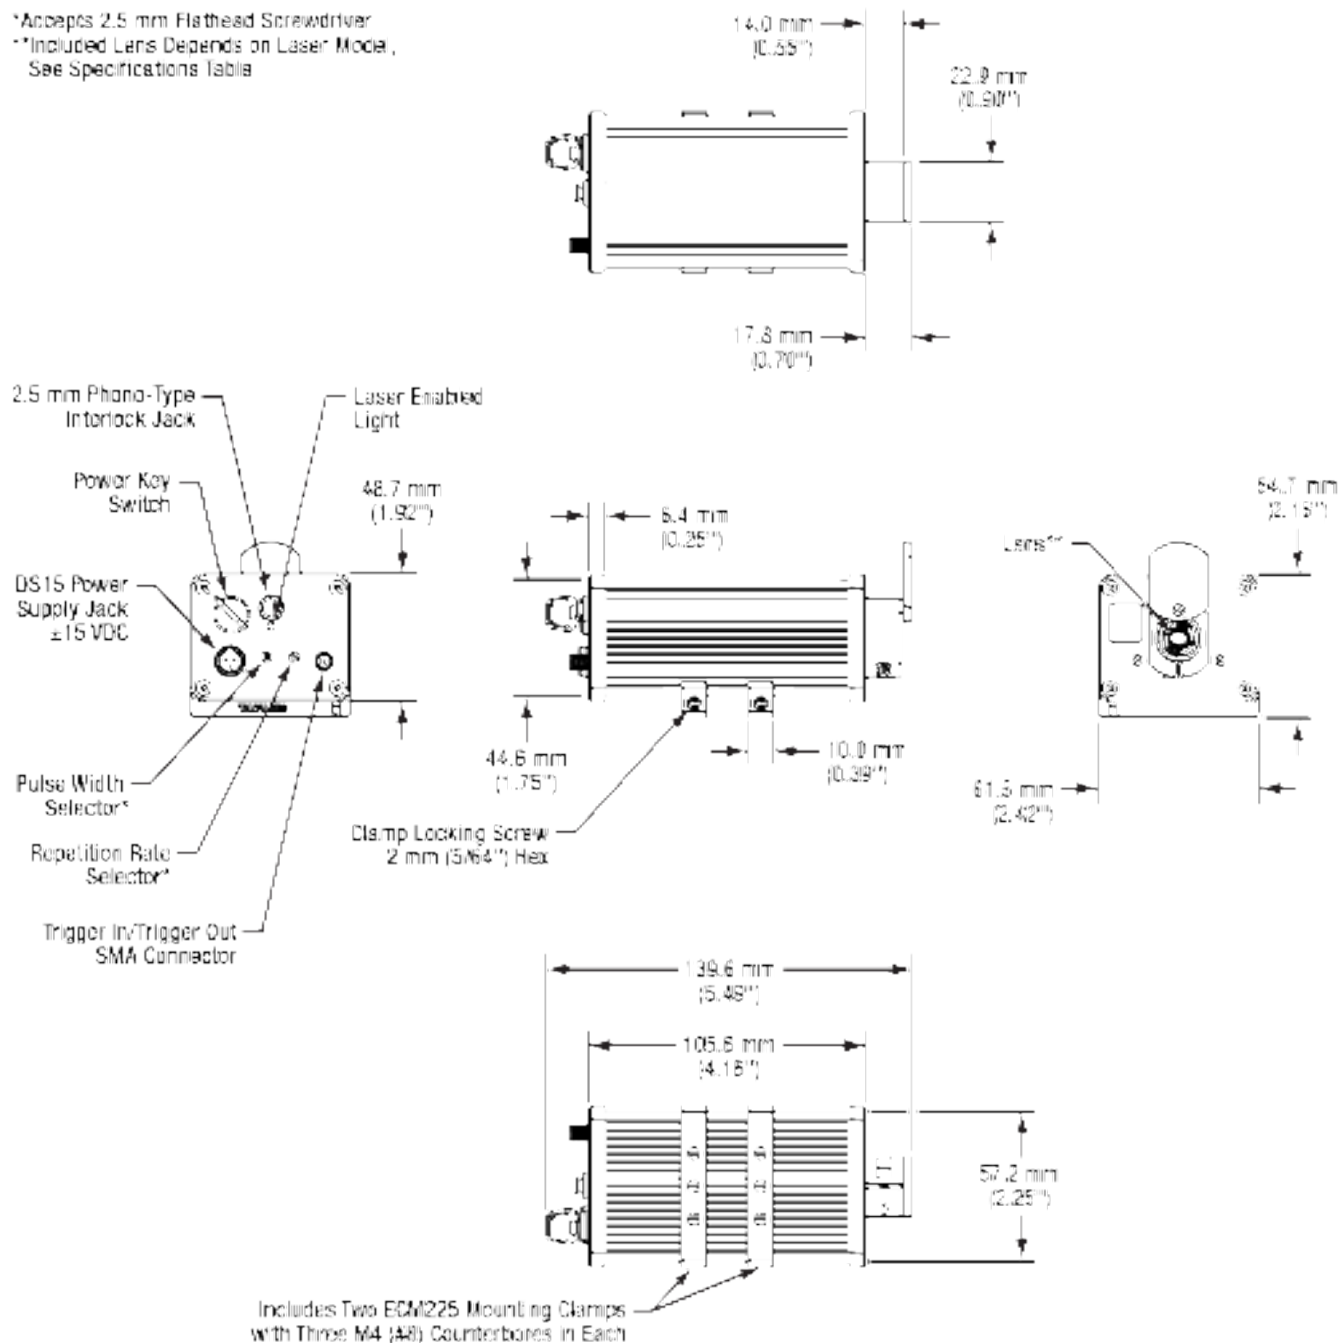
Mechanical Drawing for NPL Series Lasers with Item # Suffix B
